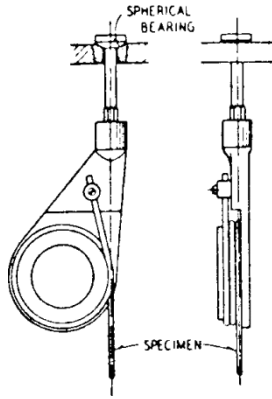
Gripping Devices for Sheet and Wire Specimens
